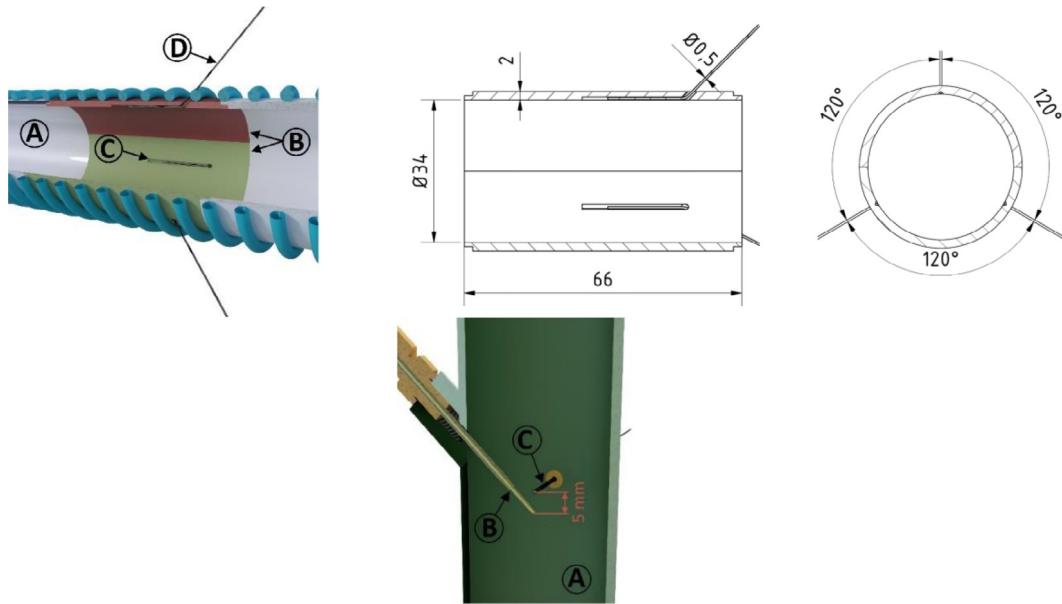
Top - Section view and technical drawing of the positioning of the inner wall thermocouples. A: condenser tube, B: 2 tube sections, C: groove, D: thermocouple section; Bottom - View of the riser tube (A) with the needle probe (B) and the thermocouple (C).
